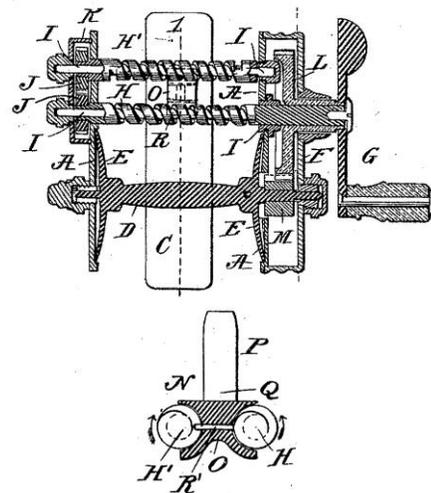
Patent diagrams showing (top) Shakespeare's twin-screw level wind in a bird's-eye view of his reel. The lower drawing shows a cross-section of the line guide base. The sliding pin (R') rides alternately in the grooves of screws H and H'.
